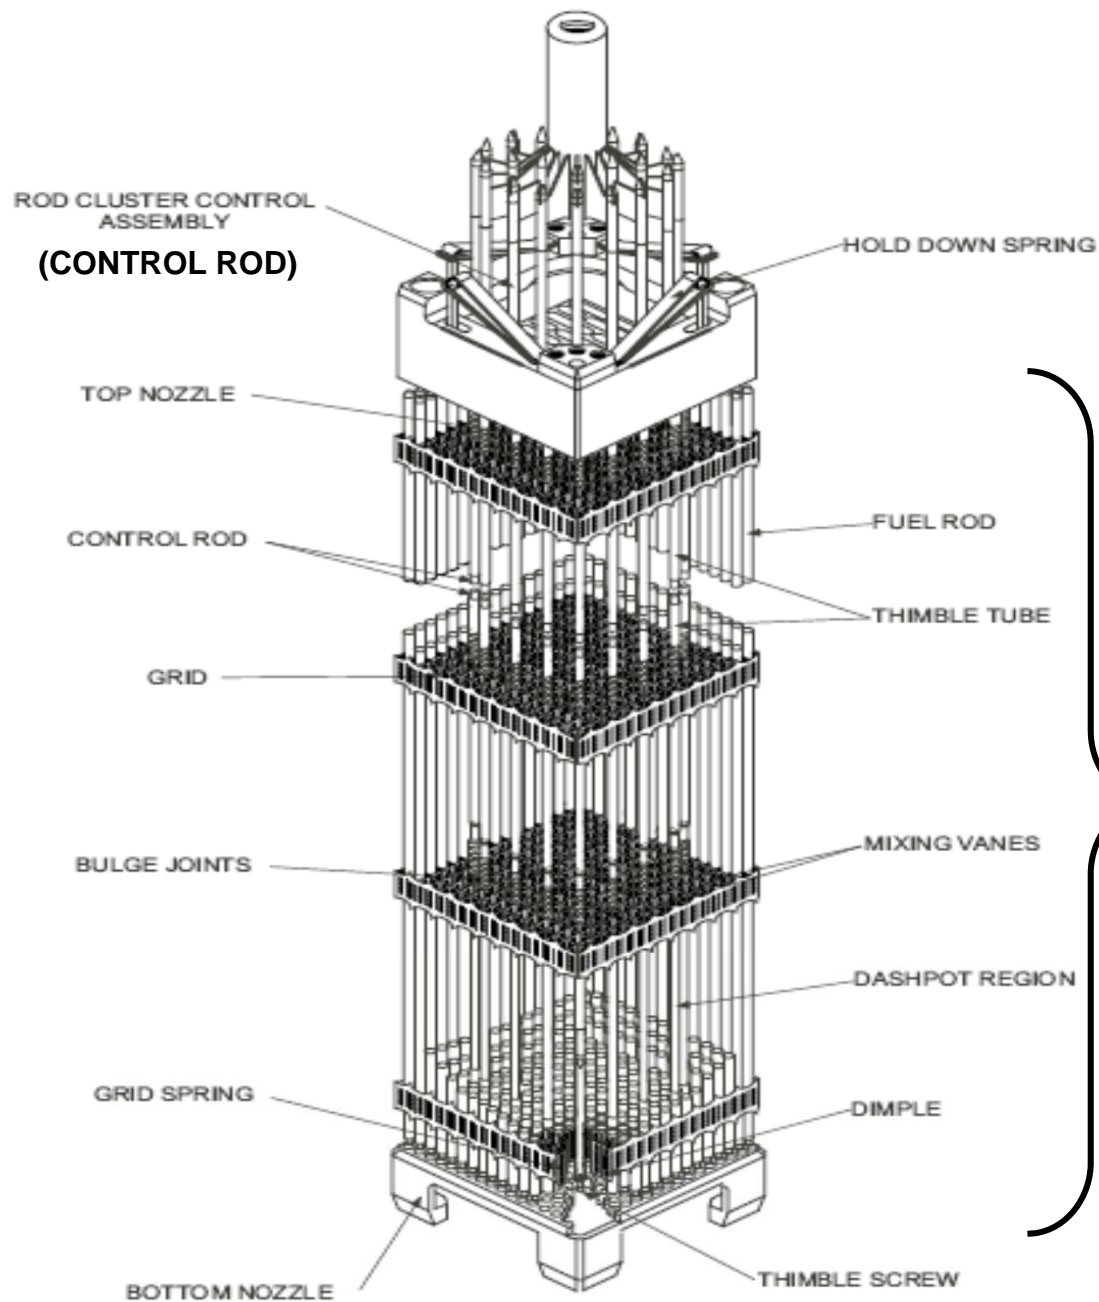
Typical PWR Fuel Assembly with Control Rod
